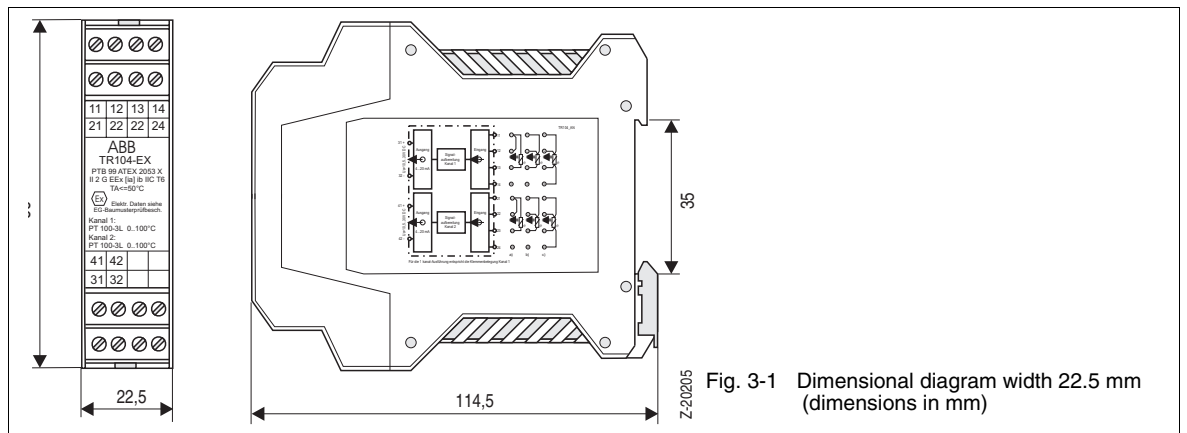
Dimensional diagram width 22.5 mm (dimensions in mm)
